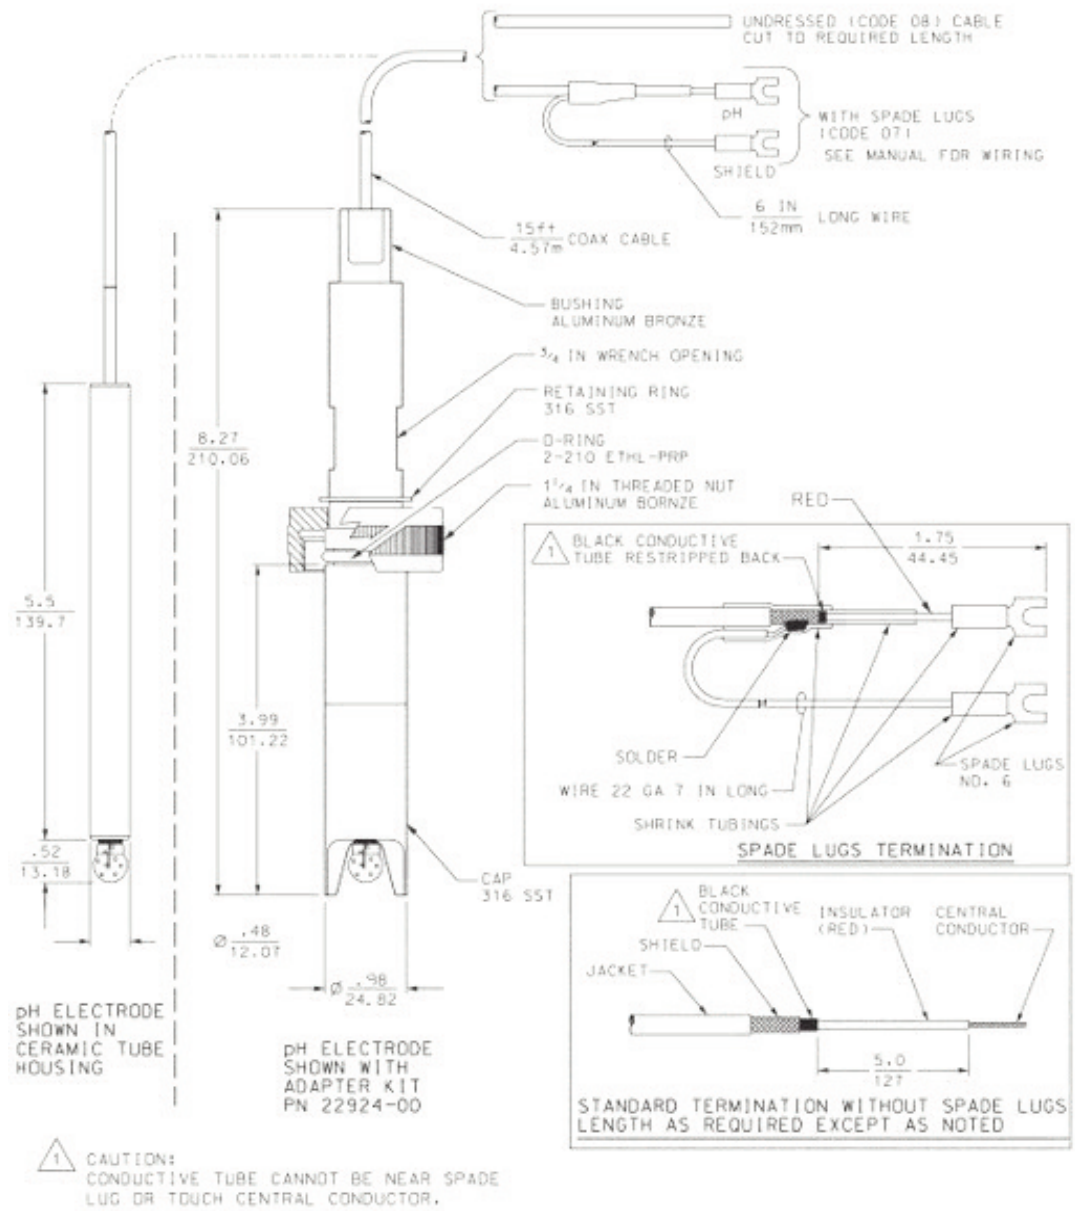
Dimensional Drawing for Rosemount 328A and Optional Mounting Adapter Hardware Kit (PN 22924-00)
